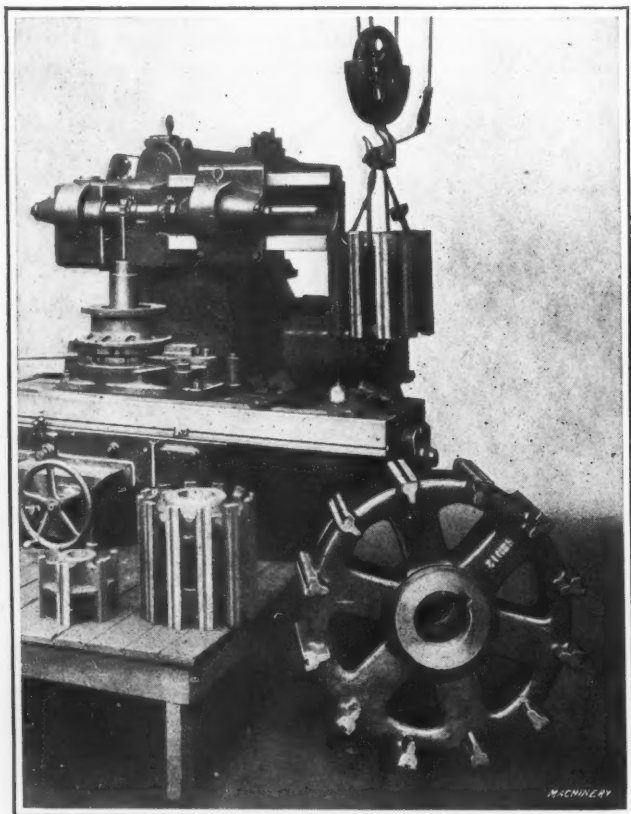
Milling Machine equipped with Special Cutter-heads for milling Dovetail Slots in Armature Spiders
